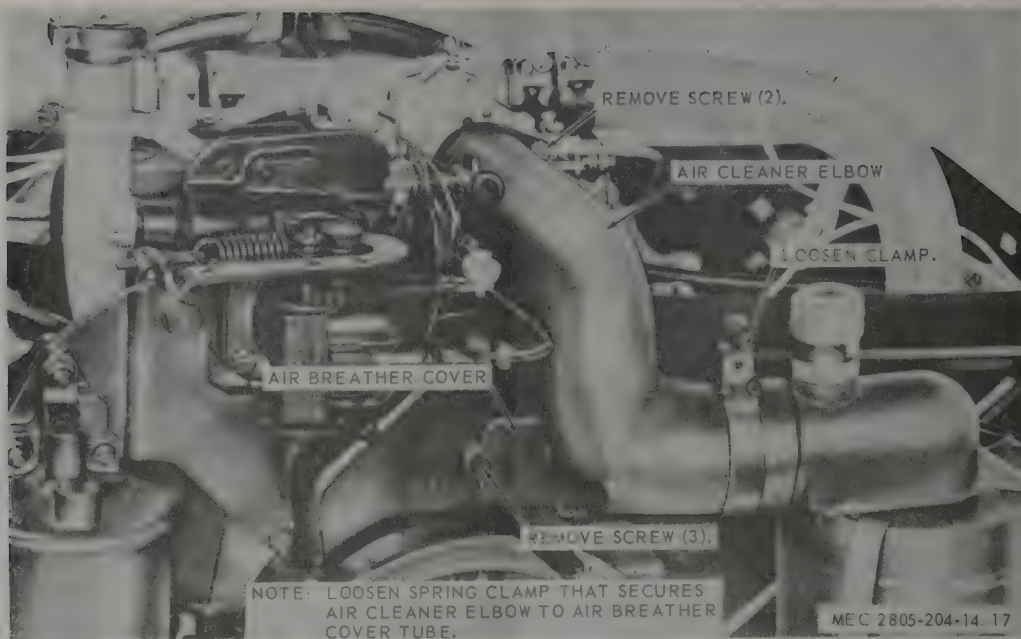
Air cleaner elbow and air breather cover, removal and installation.
